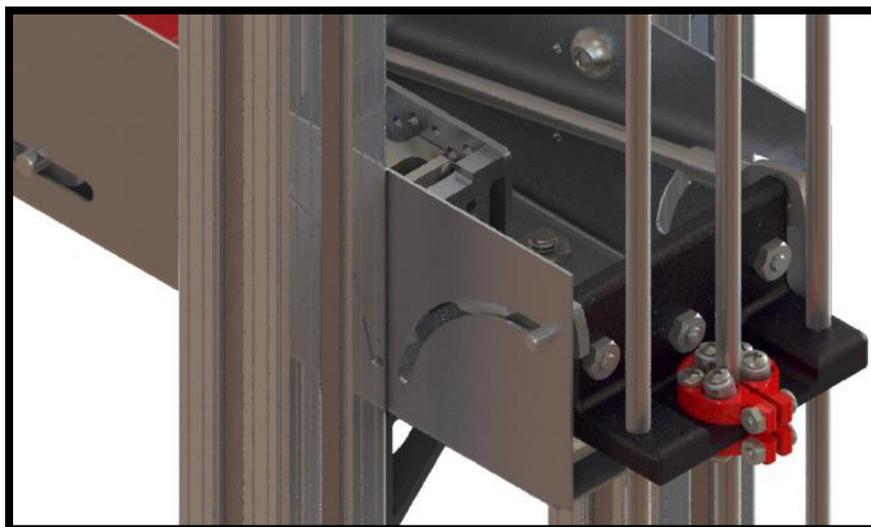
Threadless ball screw assembly mounted on U-shaped channel, 3D model.
